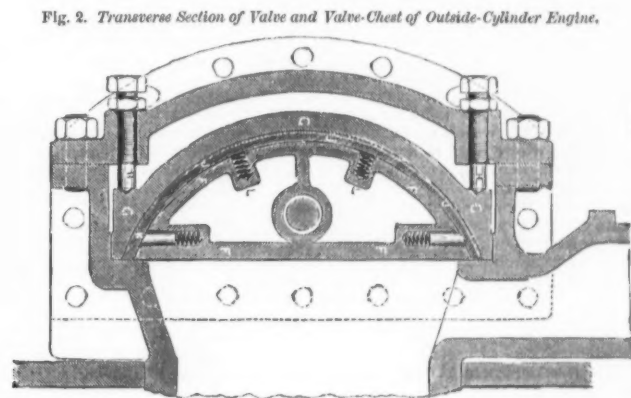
Transverse Section of Valve and Valve-Chest of Outside-Cylinder Engine.
